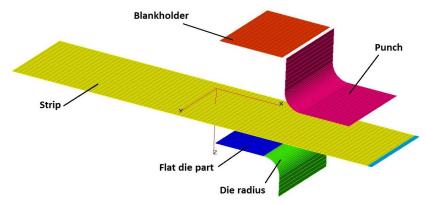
Set-up of strip drawing simulation – strip bending and pulling
